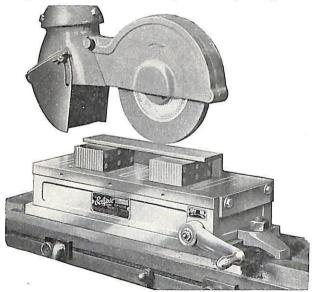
'' Eclipse '' permanent magnet chuck holding work on table of surface grinder, showing use of special packings
